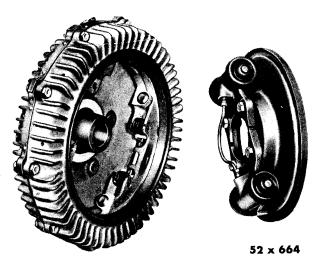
Removing or Installing Rear Disc Brake Hub and Housing
